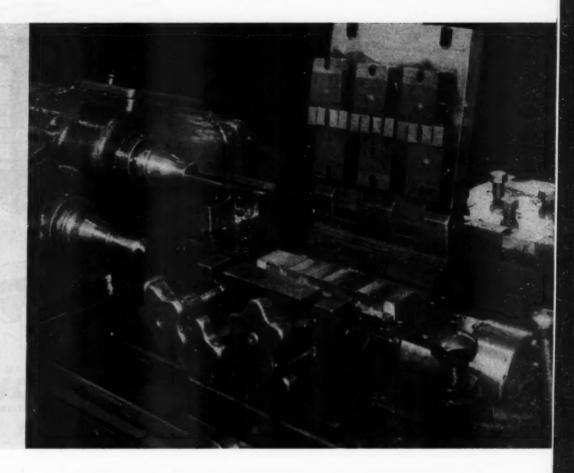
Stationary fixture for gang drilling a large group of similar parts
